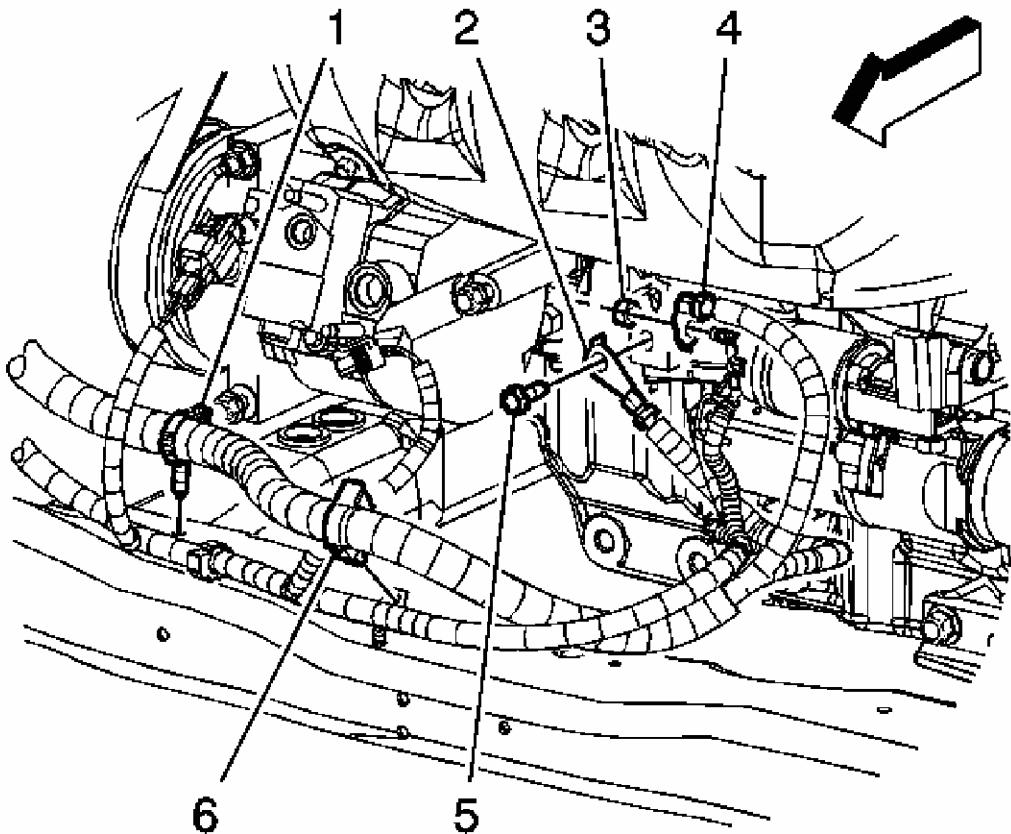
Identifying Starter Solenoid & Starter Motor Cable Terminals
